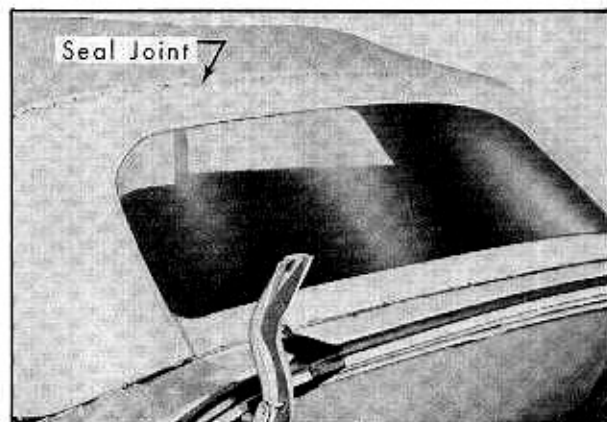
Sealing Top Material to Rear Bow Joint
